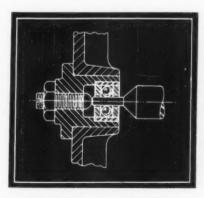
Adjustment screw, touching end of shaft, is used to take up end play in this miniature bearing mounting
